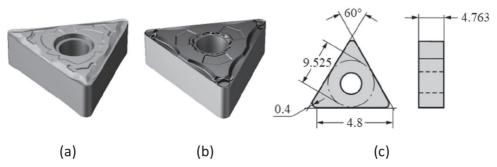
Inserts: (a) TNMG 160404-SF 1115; (b) TNMG 160404-LC 4315; (c) geometric and dimensional configuration for both.
